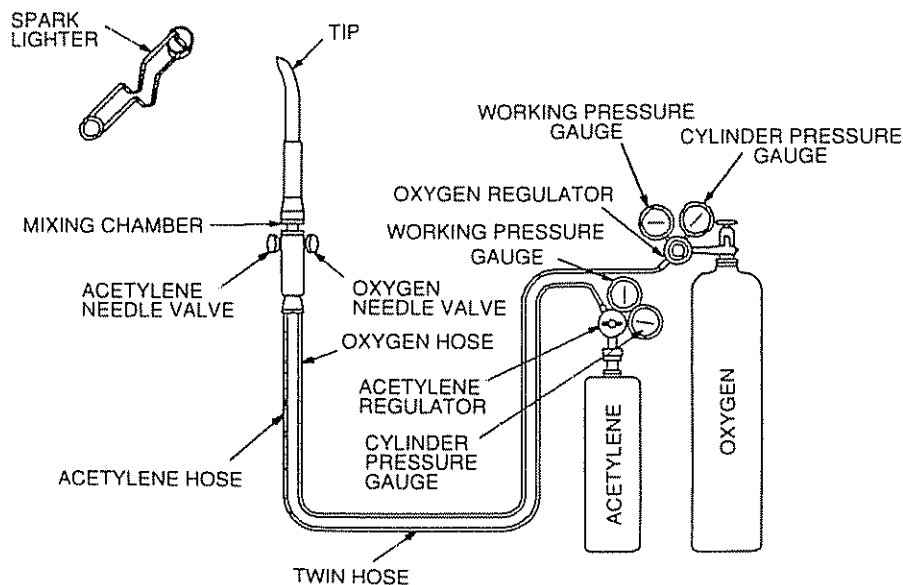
Oxyacetylene gas welding equipment
